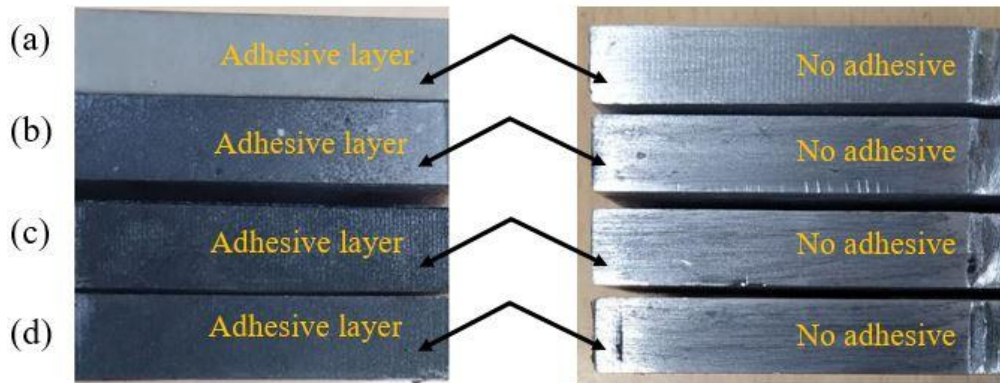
Fracture surfaces illustrating the interface fracture of (a) Pristine, (b) 0.1 wt.%, (c) 0.2 wt.%, (d) 0.3 wt.% of MWCNTs reinforced adhesively bonded joints.
